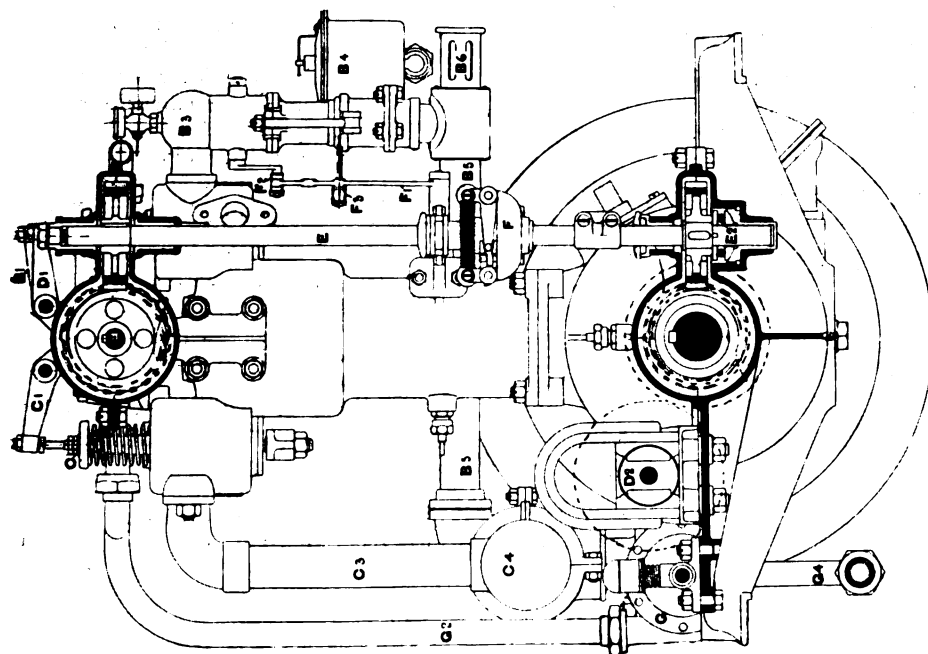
Rear View of the 24-h.p. Straker-Squire Petrol Engine, showing the arrangement of the Valves, the Igniters, the Carburettor, and the Exhaust Pipes.
